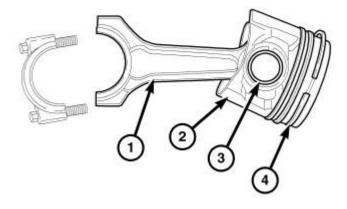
Piston & Connecting Rod Courtesy of CHRYSLER LLC
